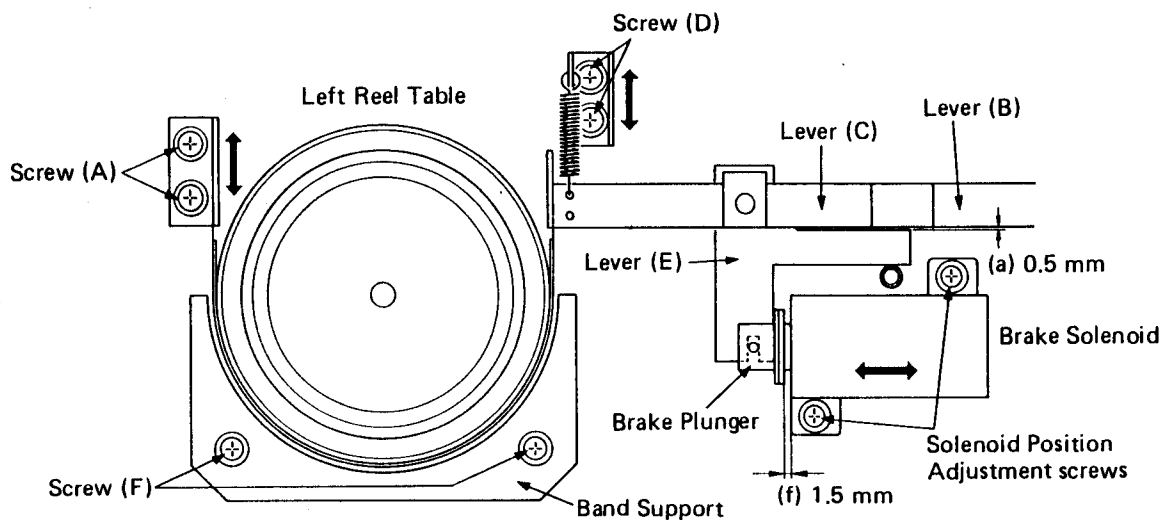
BRAKE MECHANISM & TORQUE ADJUSTMENTS
